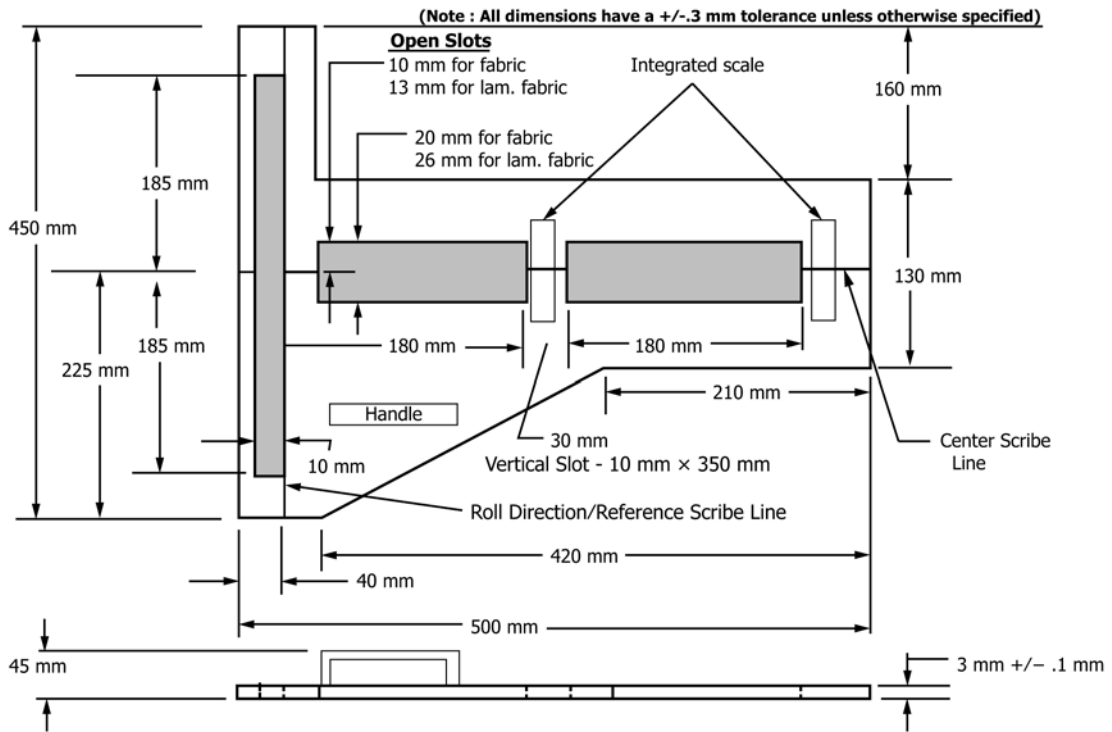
Bow Skew Tool with Open Slots—Dimensioned
